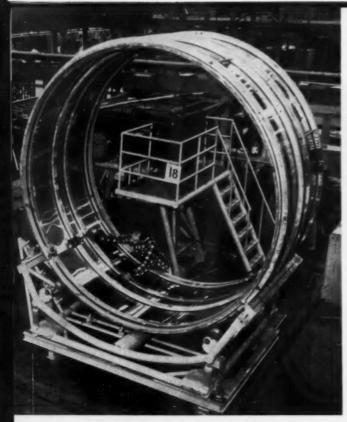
Two Overlapping Tank Segments Are Positioned for Transverse Roll Seam Welding to Make a Leak-Tight Joint, Seam weld is reinforced by rows of spot welds on each side of the seam weld. Successive segments are similarly attached to build up entire tank structure
